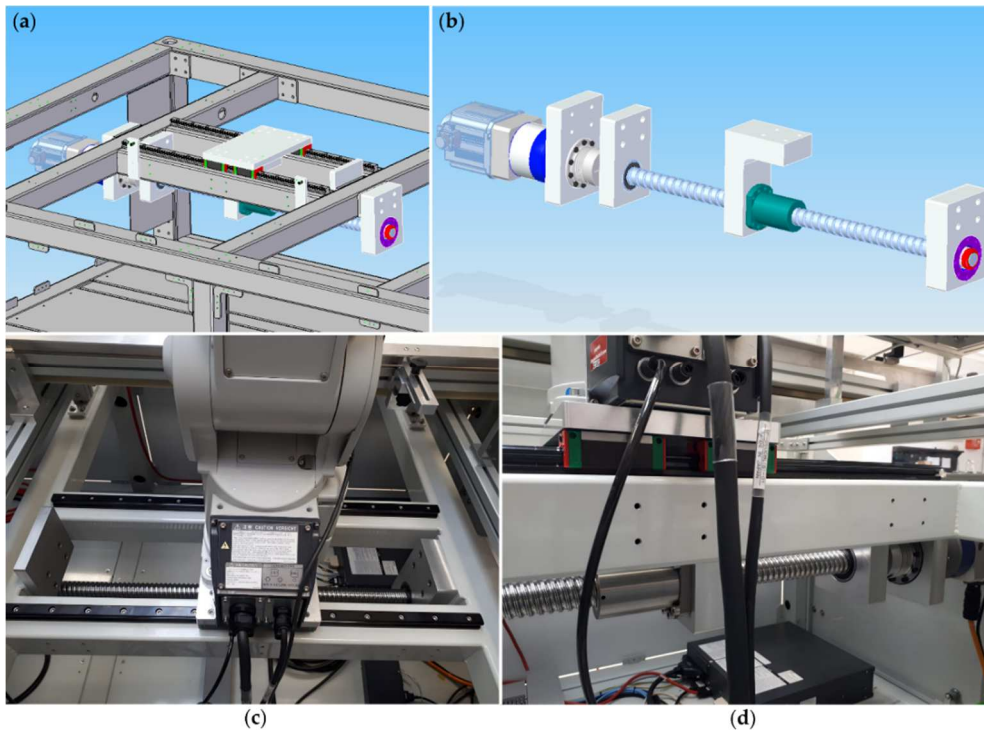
(a) CAD railway composed of all its elements; CAD (b) detail of the recirculating ball screw. (c), (d): picture of the railway.
